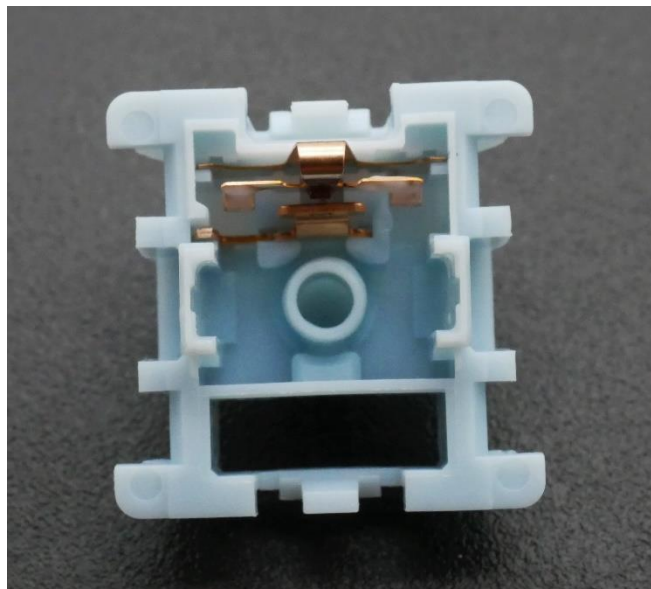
Momoka Shark bottom housing internals showing factory lubrication on leaf, padded bottoming out regions, and large N/S side spring collars.
